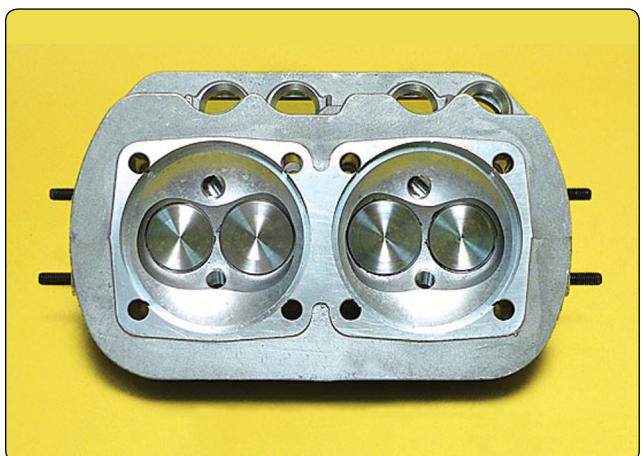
Hemispherical combustion chamber within the Revmaster R-2300 Heads.
